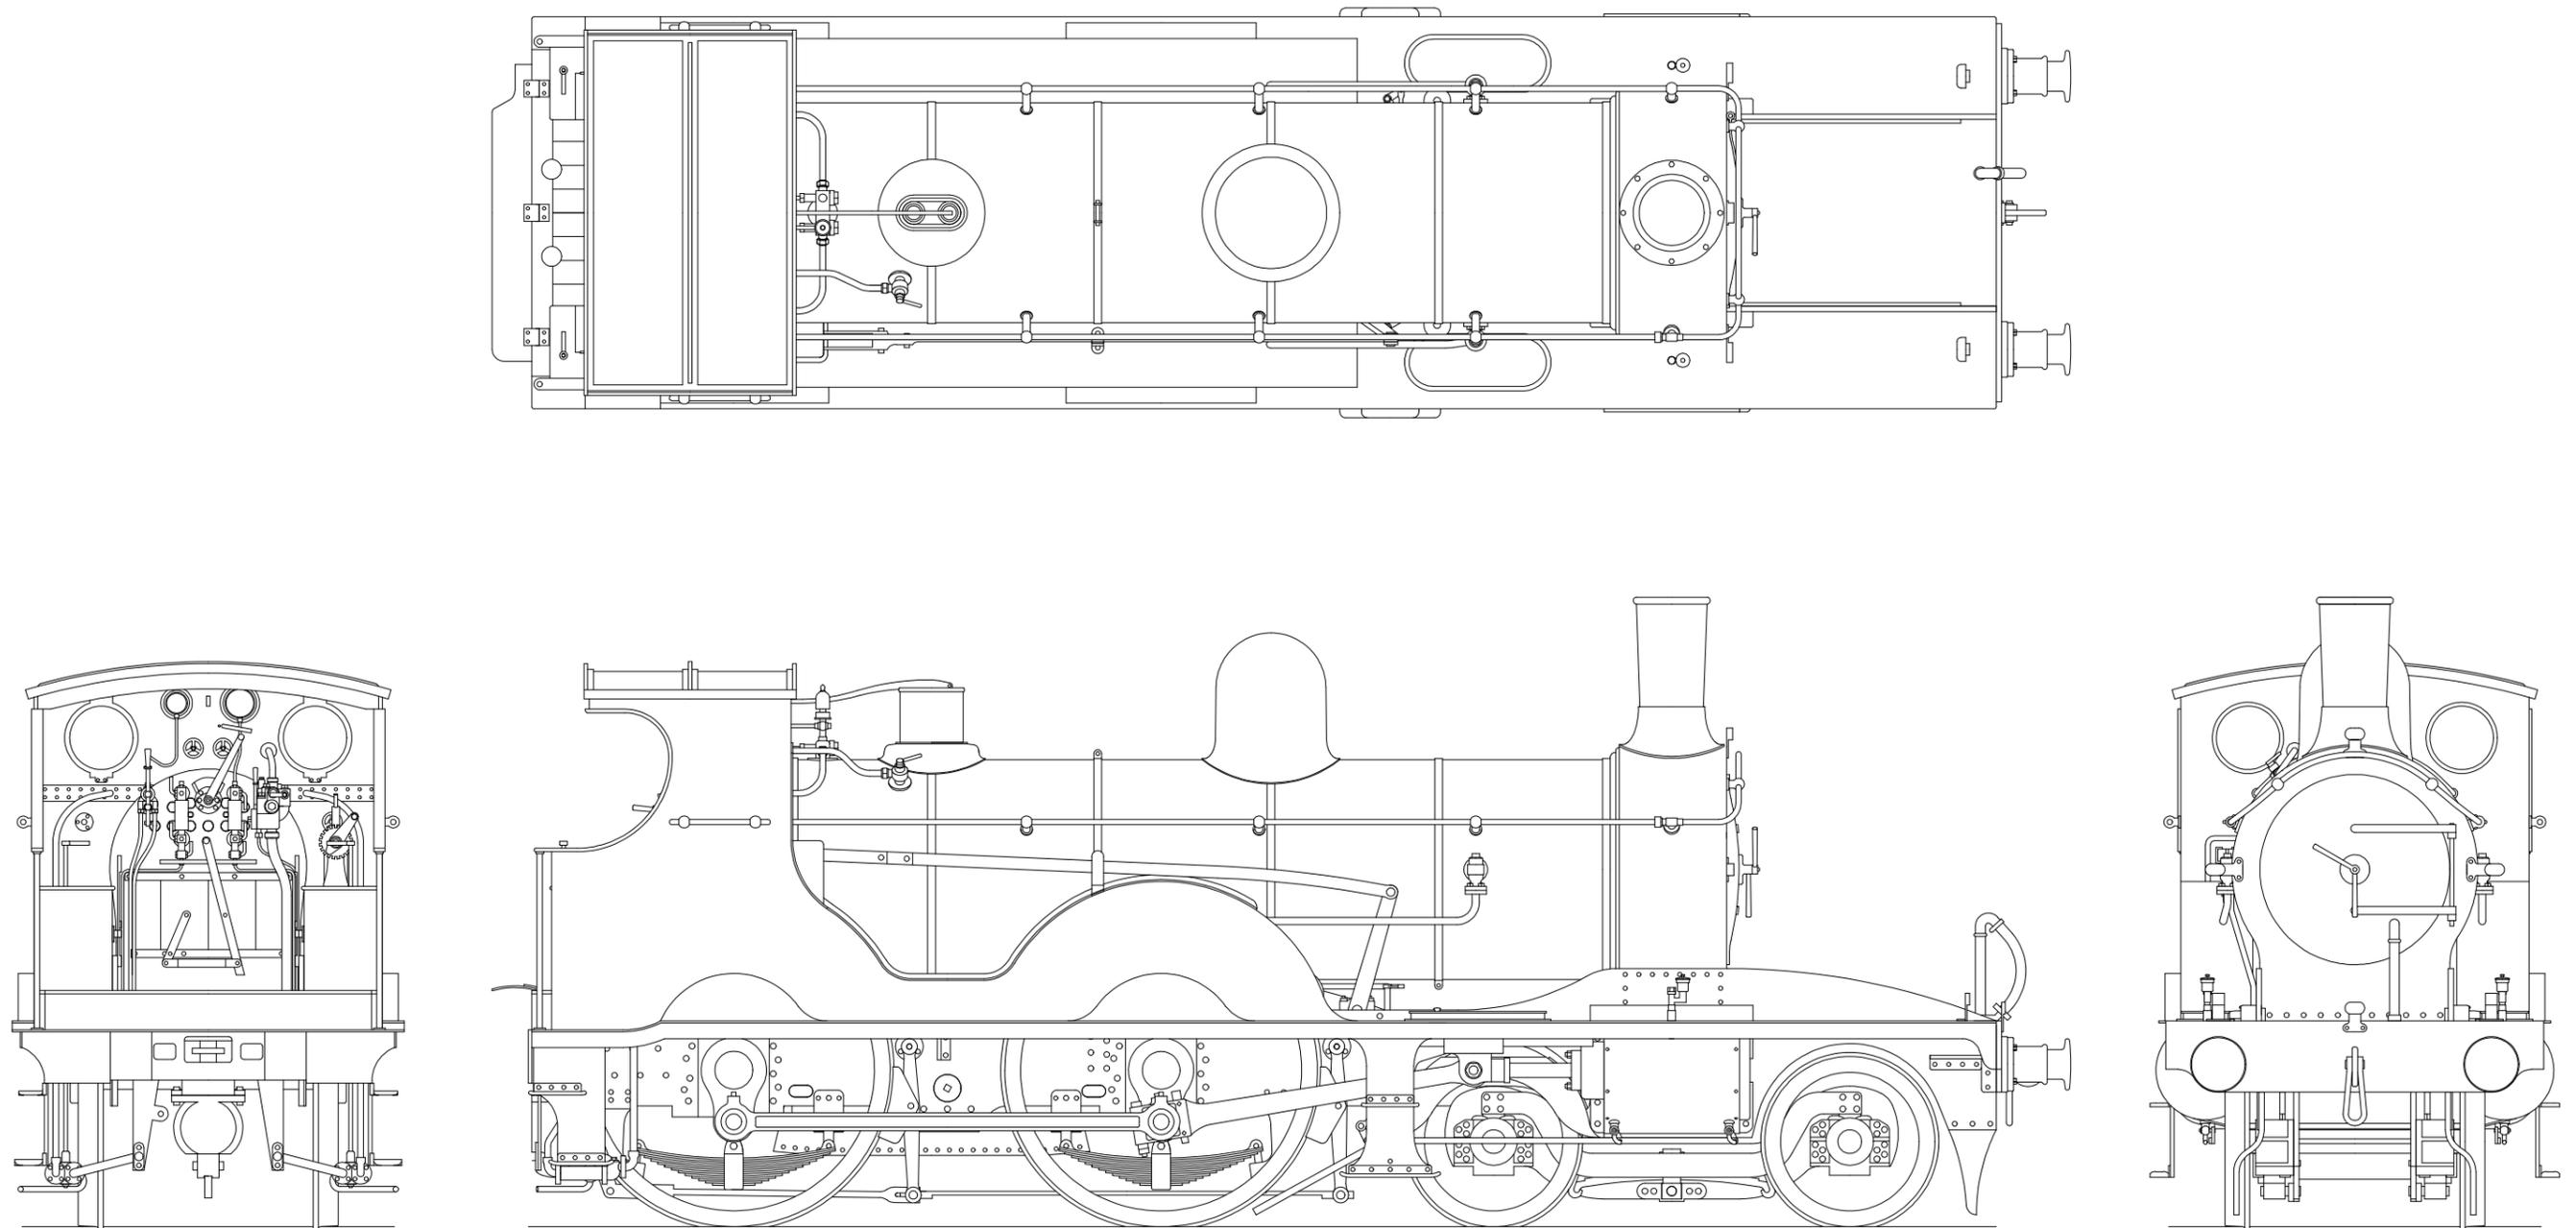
T3 depicted circa 1910 - equalising beams, tail rods and leading bogie wheel splasher removed, steel cab roof, fluted coupling rods, splasher beading, lubricators in front of splashers, safety chains and large whistle removed, extra Drummond lamp brackets.
